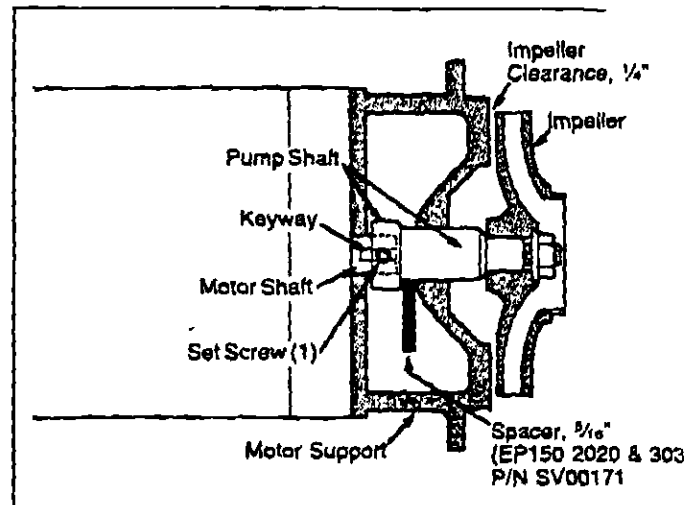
B: Pump assembly (EP150 2020 &amp; 3030)
